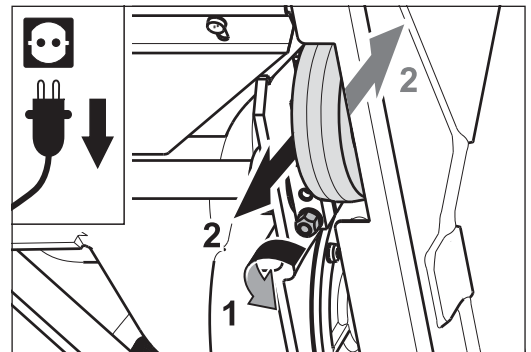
Release the screw on the right-hand wheel clamp (1) and adjust the wheel (2).
